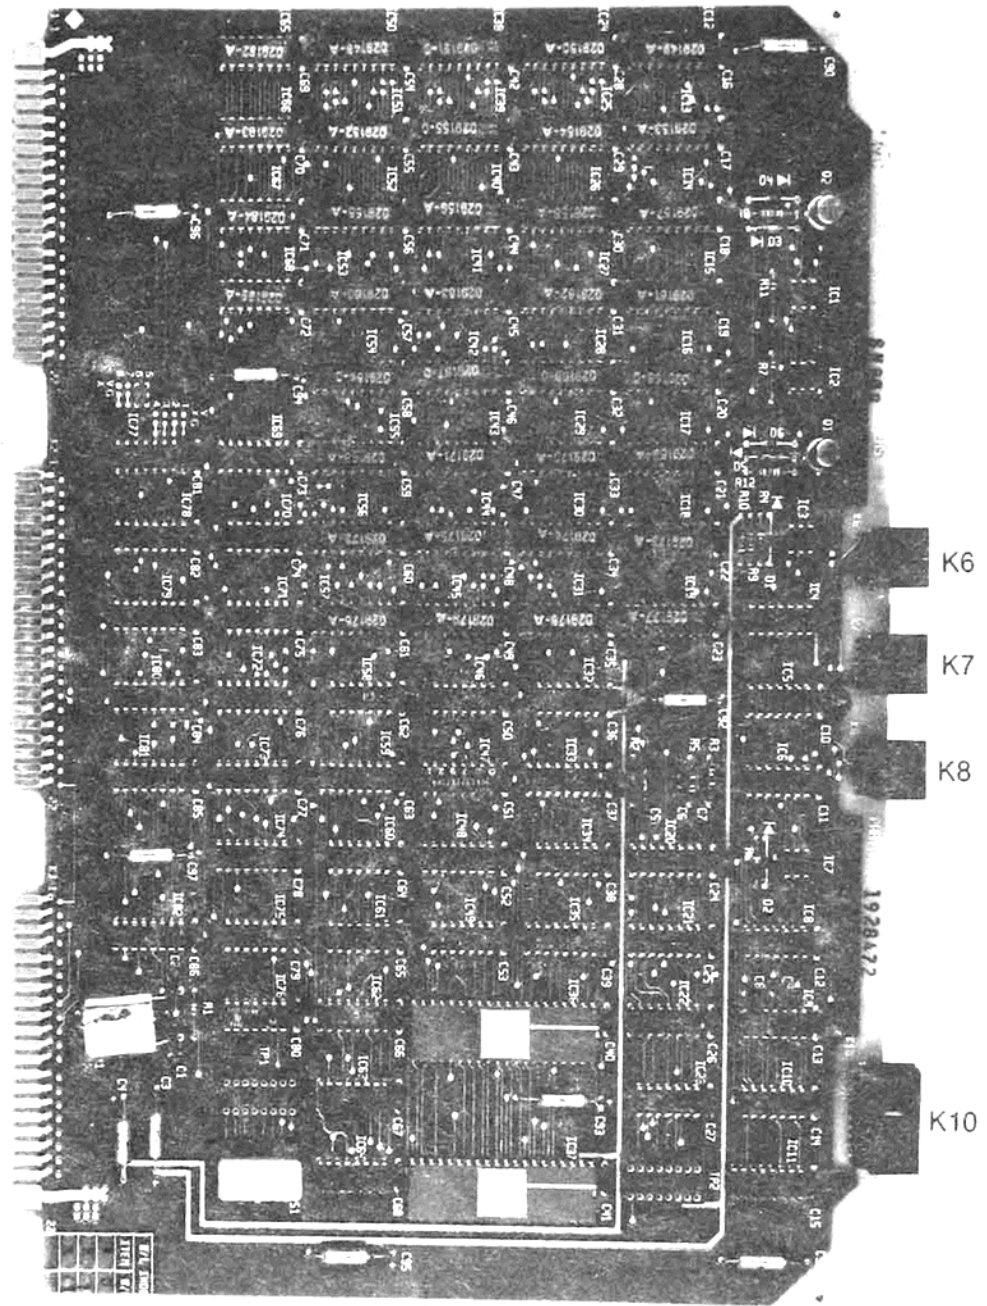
ERS Board (Refer to Section 4.6 and Drawing 1040326)
